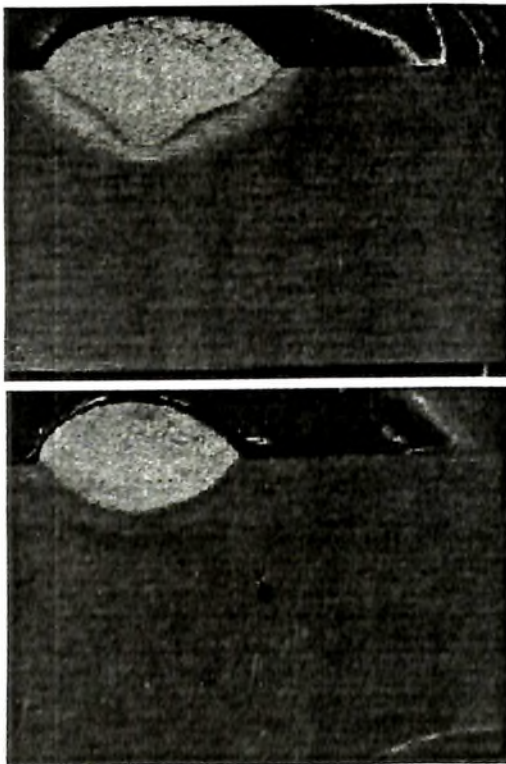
Weld beads at 194 A and 45cm/min P-GMAW (a) and GMAW (b)
